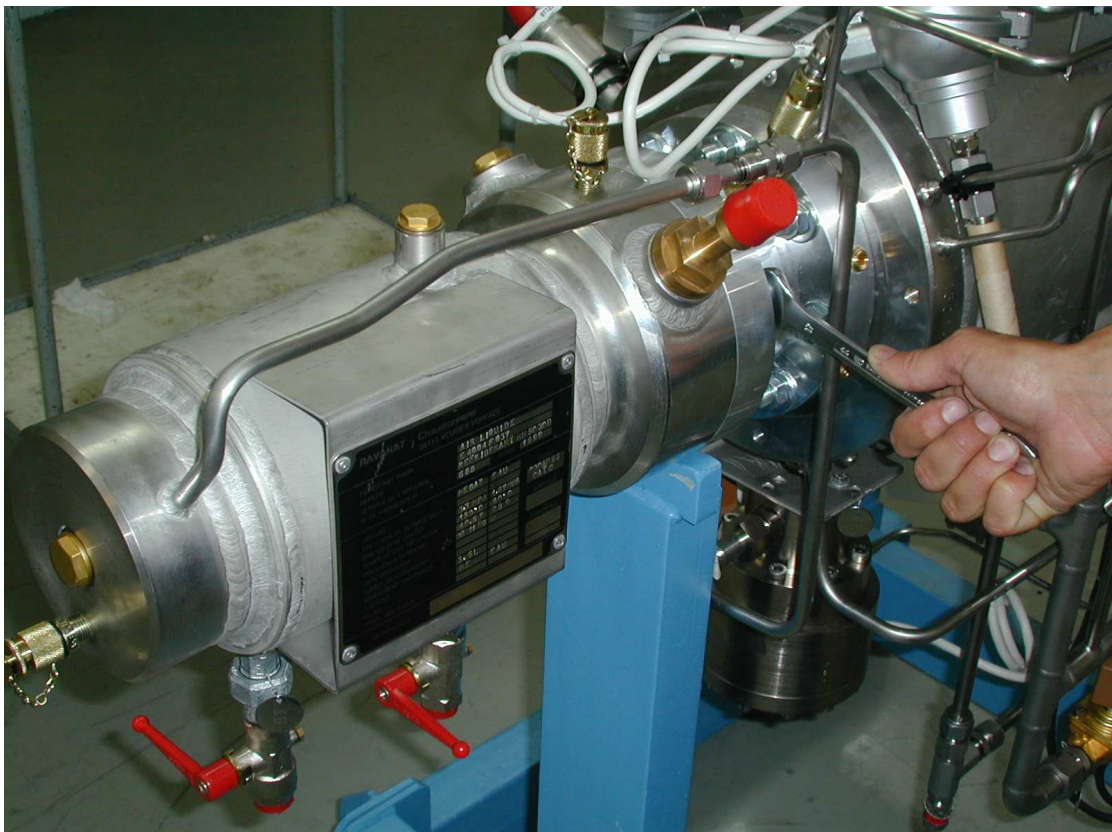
(#) and [TC4023](#) : Install the low pressure bearing temperature transmitter.
